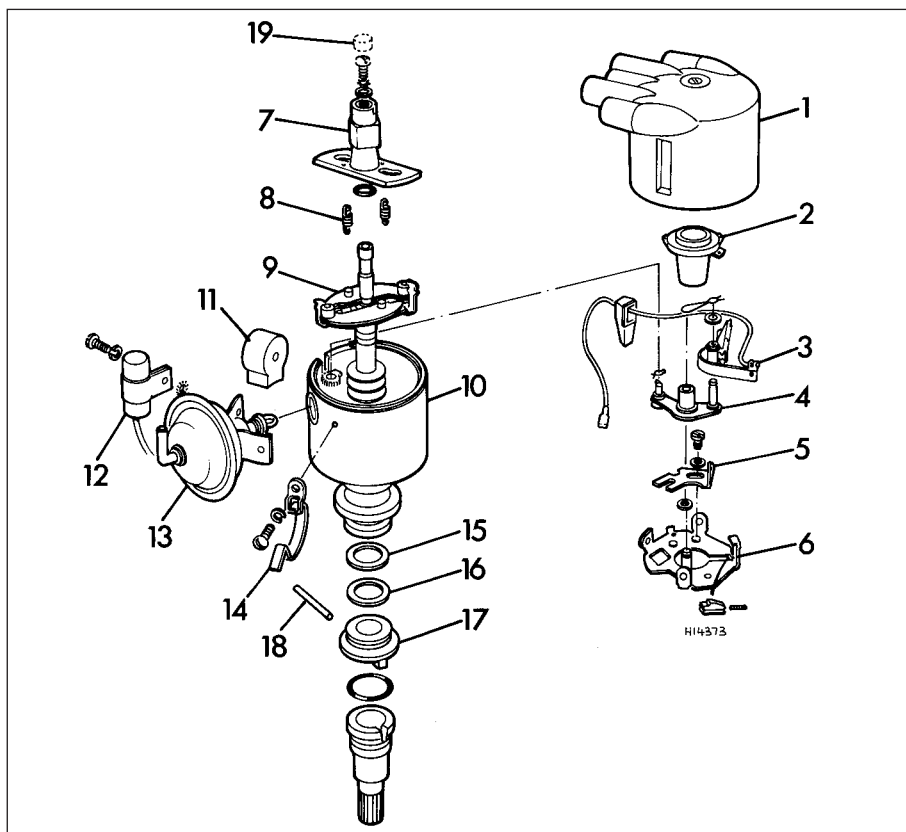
Exploded view of typical Ducellier distributor (Sec 7)
